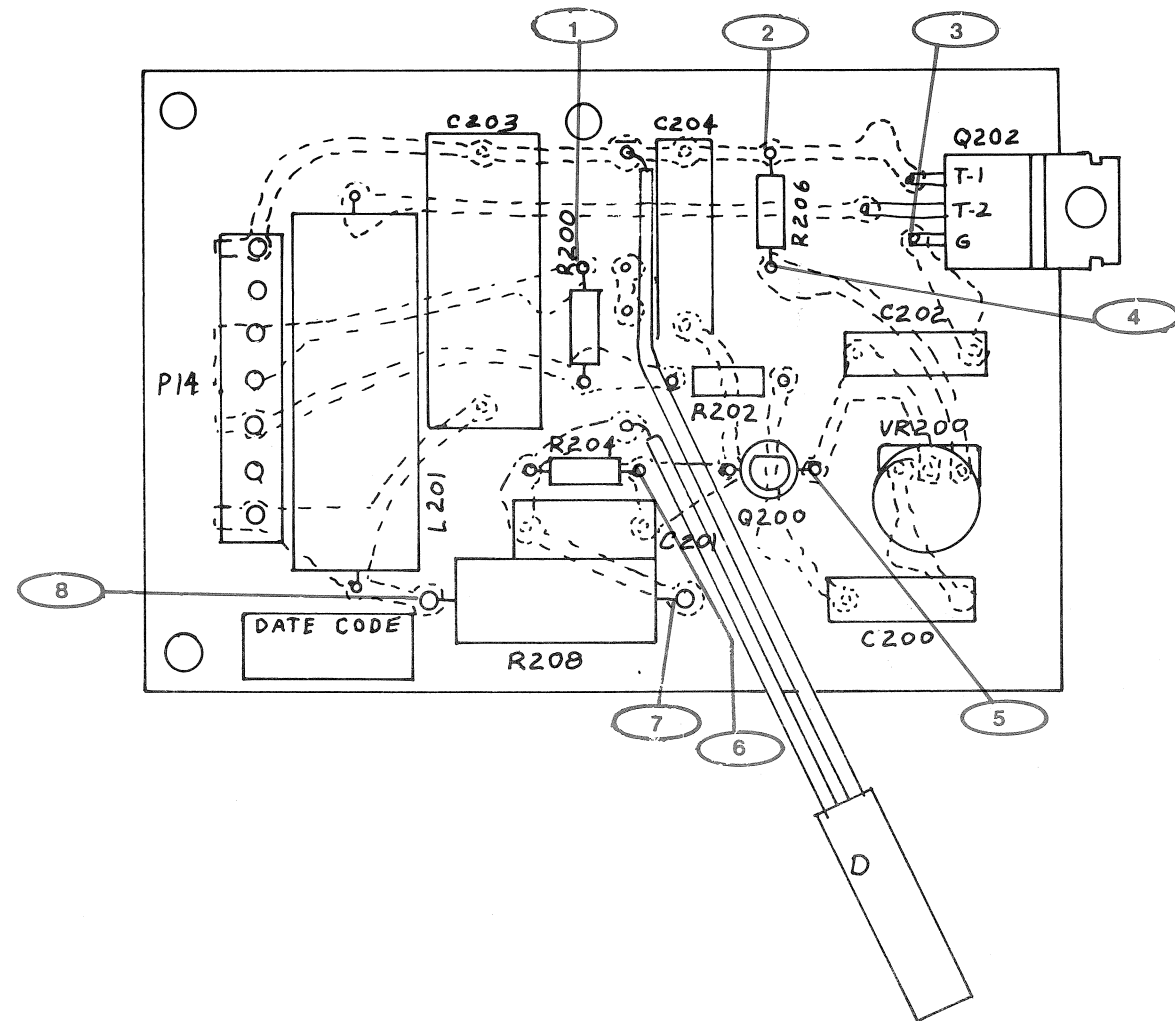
LAMP REGULATOR BOARD ASSEMBLY (Model 3230)
